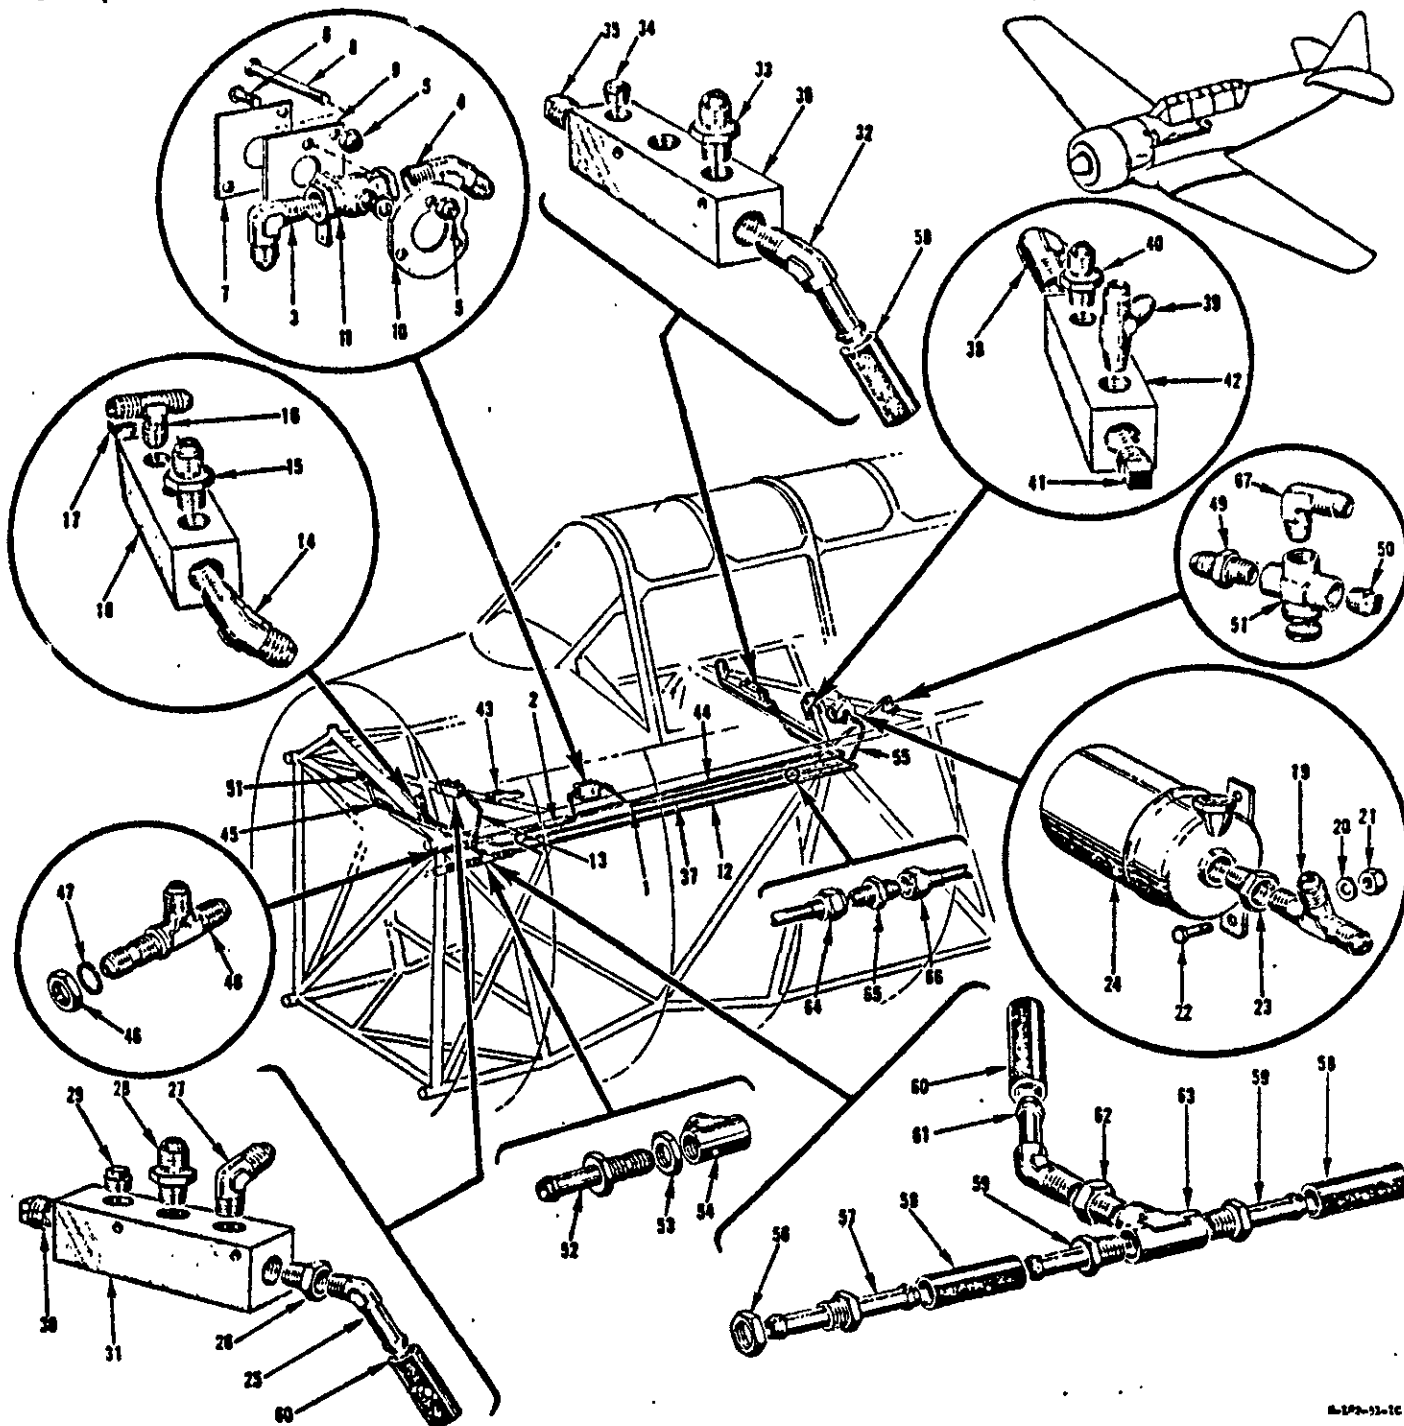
COMPLETE INSTRUMENT EQUIPMENT
